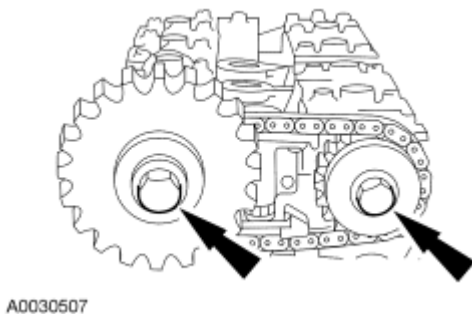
Locating Camshaft Sprocket, Washer & Bolt
